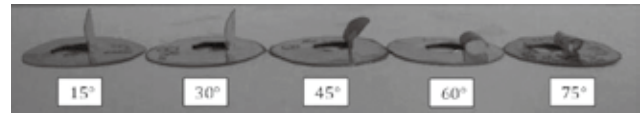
Failure morphologies of the specimens after stamping press test with punch at various edge angles
